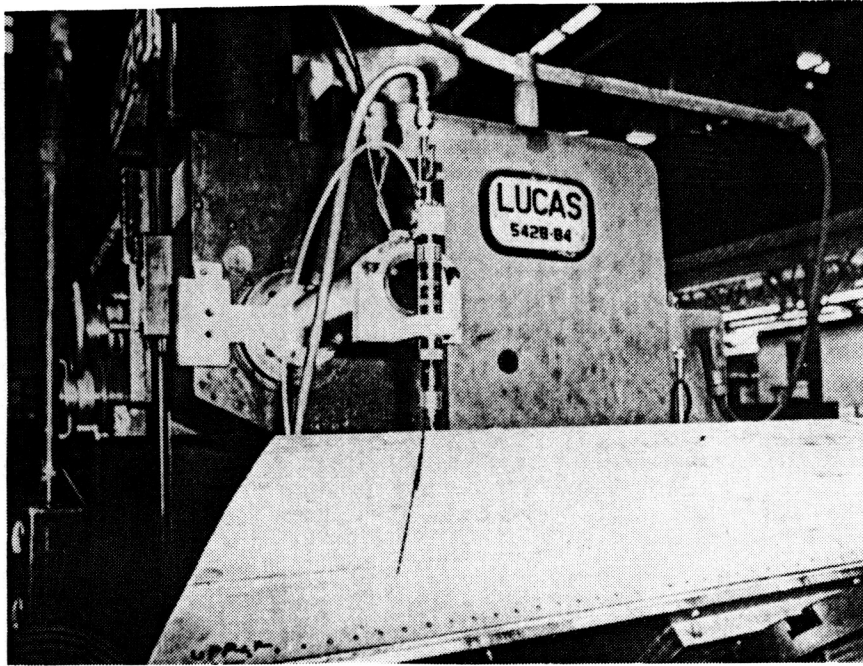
Drilling Metering Holes with Semi-Automatic Drilling Equipment
